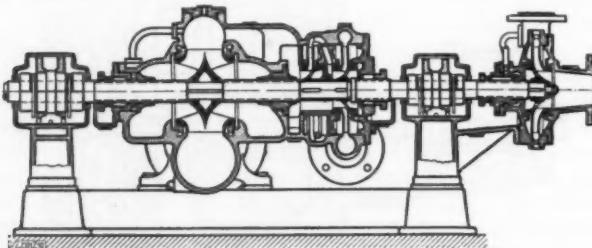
SECTION THROUGH CONDENSER PUMP SET
